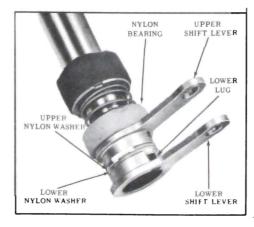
Control Shaft Assembly Ready to be Installed in Mast Jacket
